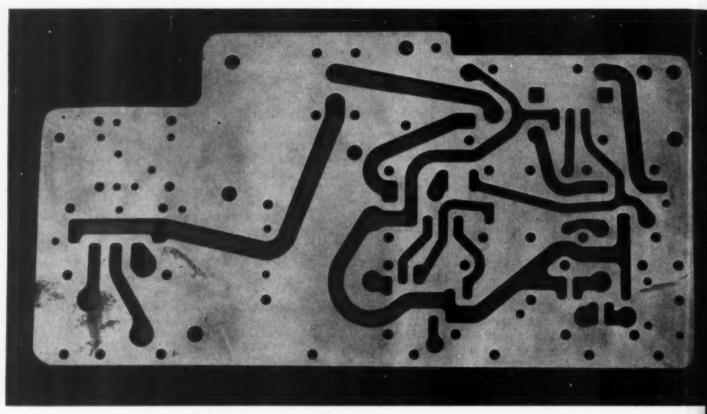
Transfer plate for a Heald internal grinding machine. Cored passages provide flow channels for pad-mounted valves to eliminate piping
